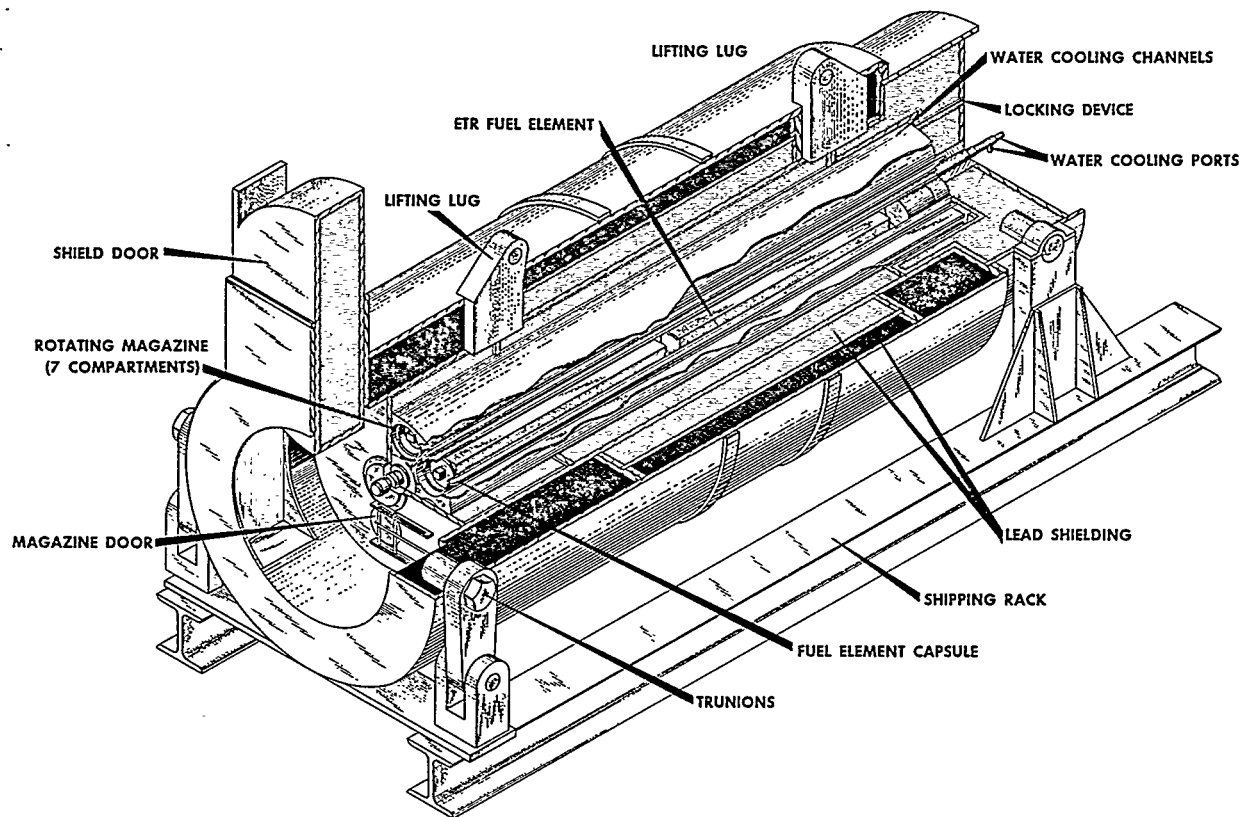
Surface Shipping Carrier for ETR Fuel Assemblies.
